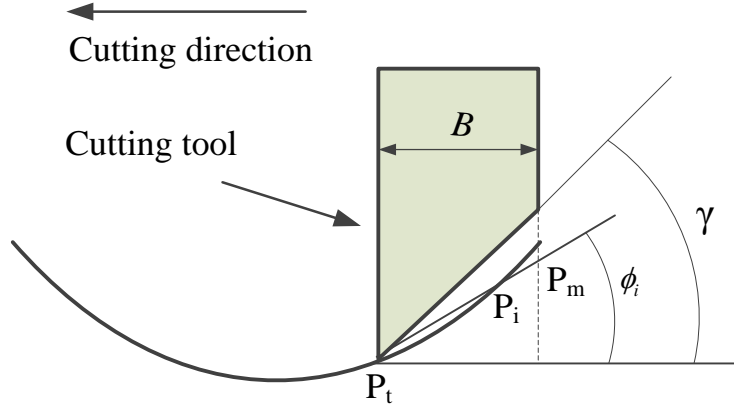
Schematic of interference between the cutting tool and the machined surface
